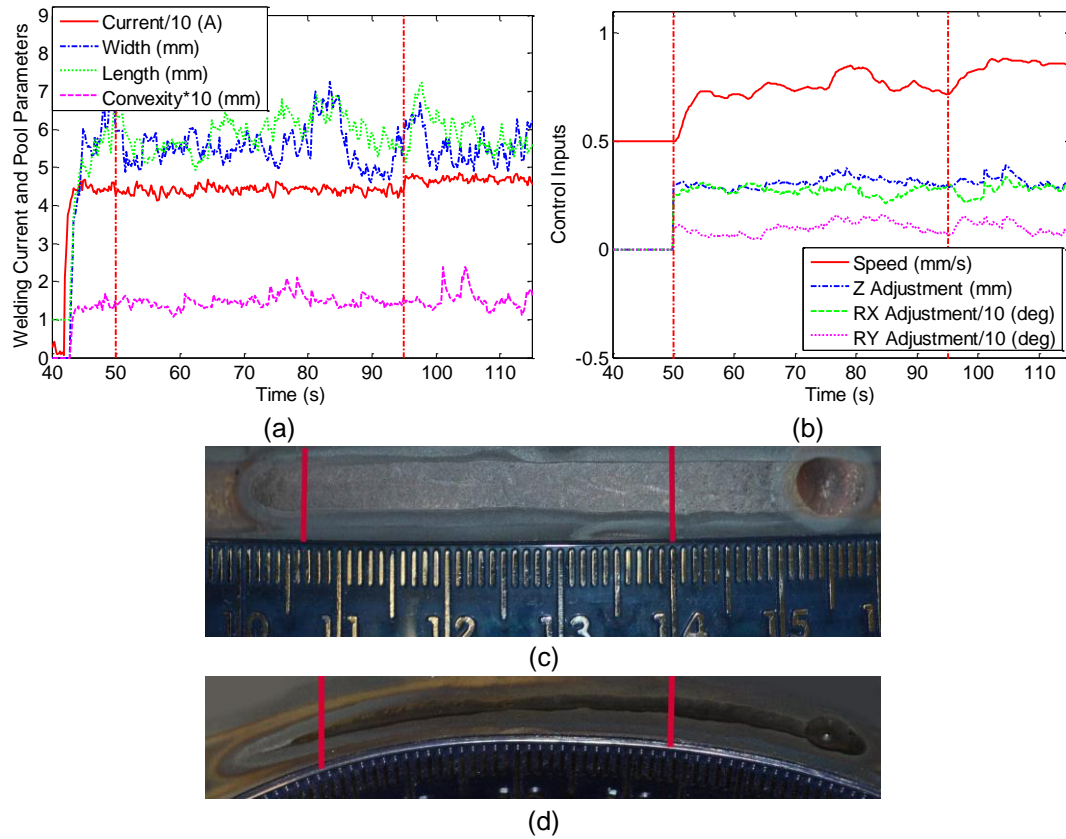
Experiment 1 results (a) Welding current and weld pool parameters (b) Control inputs (c) Front-side bead (d) Back-side bead.
